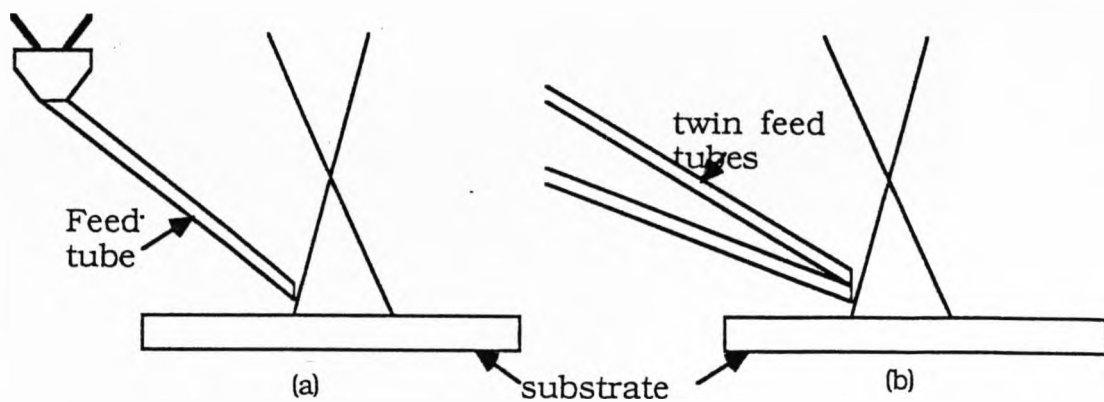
Geometry of laser cladding systems, (a) single and (b) twin feed tubes
